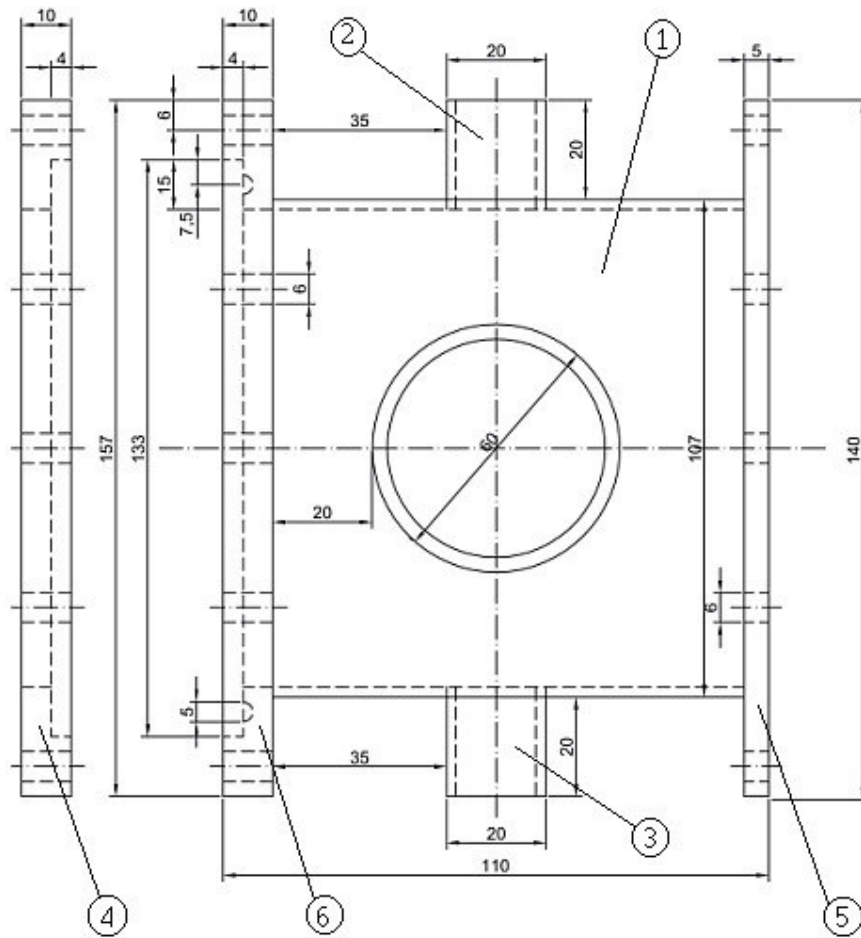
Drawing of the test section - lateral view ( 1. Main body of test section, 2. Inlet of test section for steam, 3. Exit of test section for condense steam, 4. Observation window, 5. Flange, 6. Flange )
